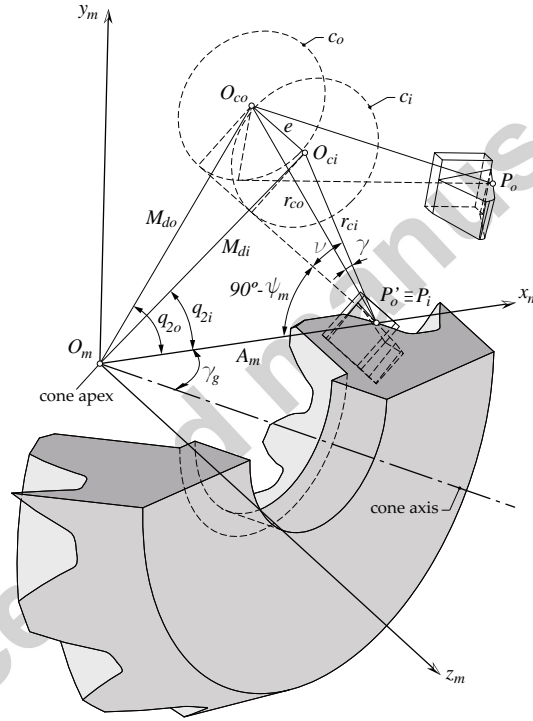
Assembly of cutter and gear in coordinate system S_m for a right-hand gear.
